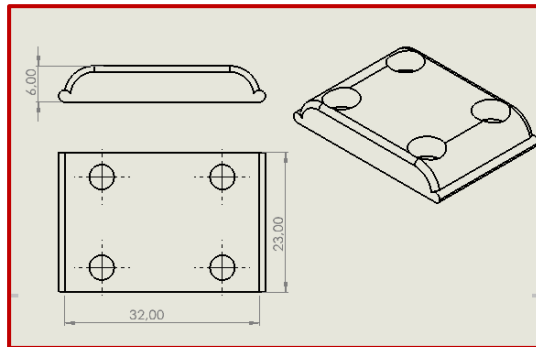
Dimensions of the component to fix the entire Resistance Fabric with Velcro System to the component used to fix the Elastic Band system
